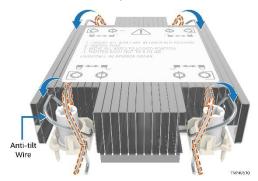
Processor Heat Sink Anti-tilt Wires in the Outward Position
